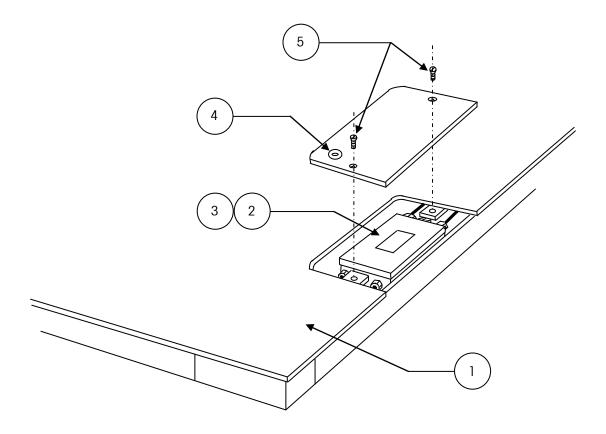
Platform and Junction Box Assembly (22563XXXXX-A)
